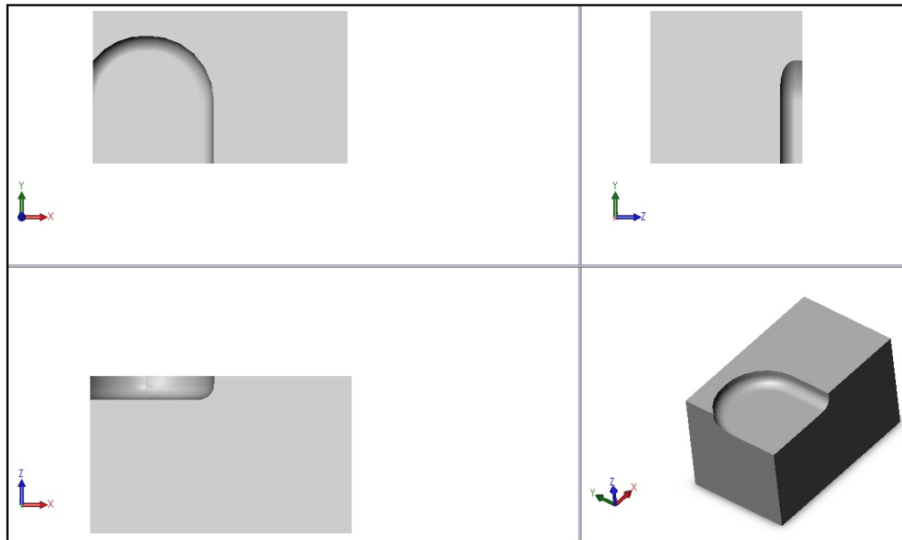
Output for tool path in Annexure 1 for torus end mill cutter.
